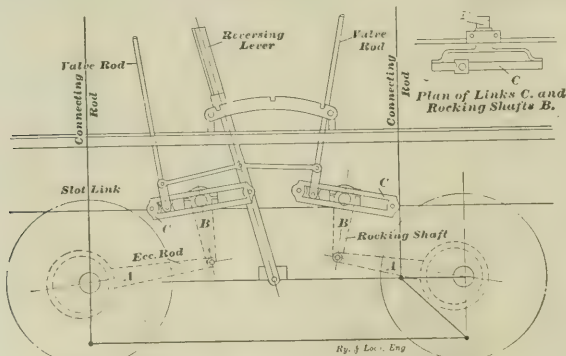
PRESENT DAY VALVE GEAR OF OLD ENGINE.
